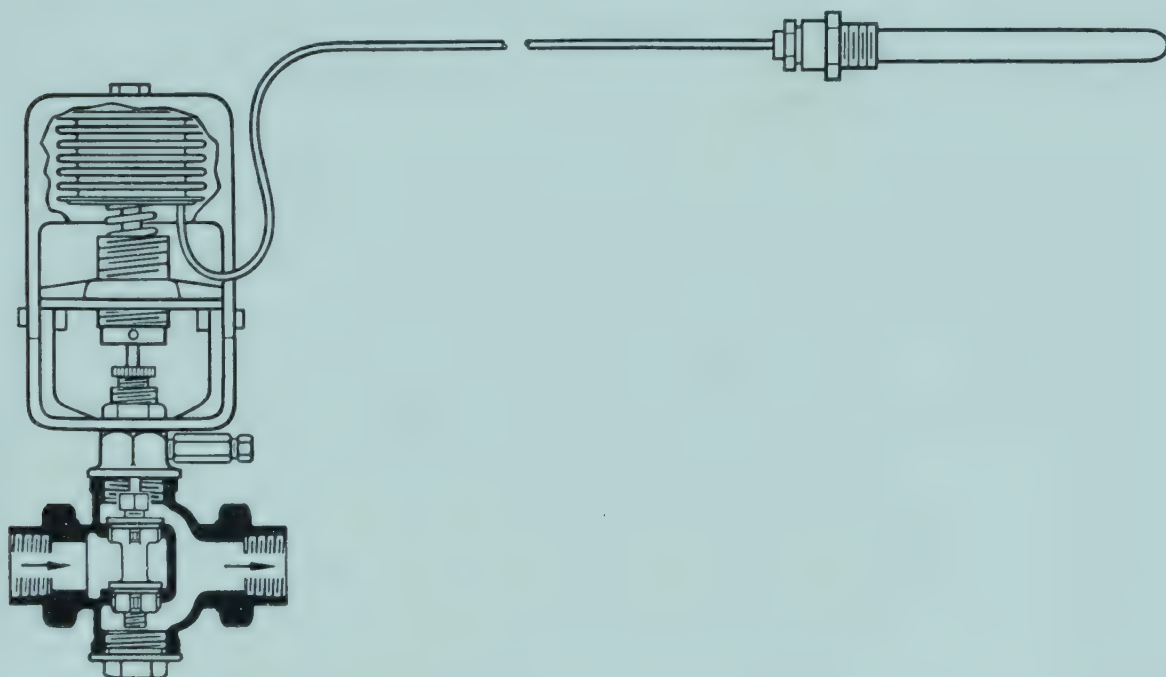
A cross-section drawing of a self-operating controller. (*Courtesy The Powers Regulator Co.*)
